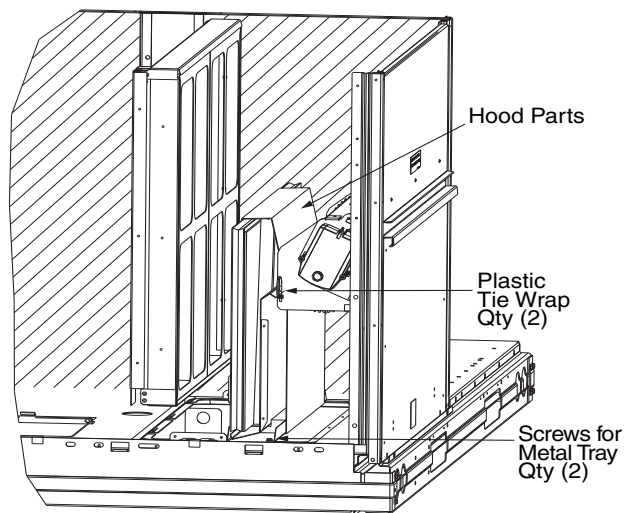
Economizer and Two-Position Damper Hood Parts Location
